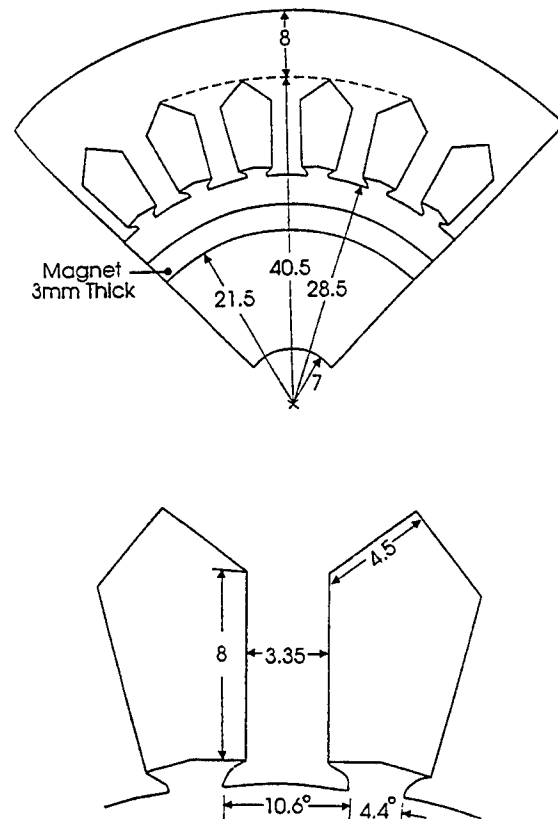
Top: view of one-quarter of the test motor; Bottom: enlarged drawing of one tooth. Dimensions in millimetre.
